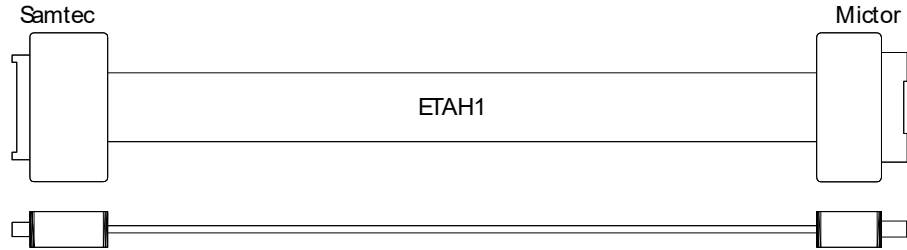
ETAH1 XETK-V2.0B - ECU Adapter Cable
